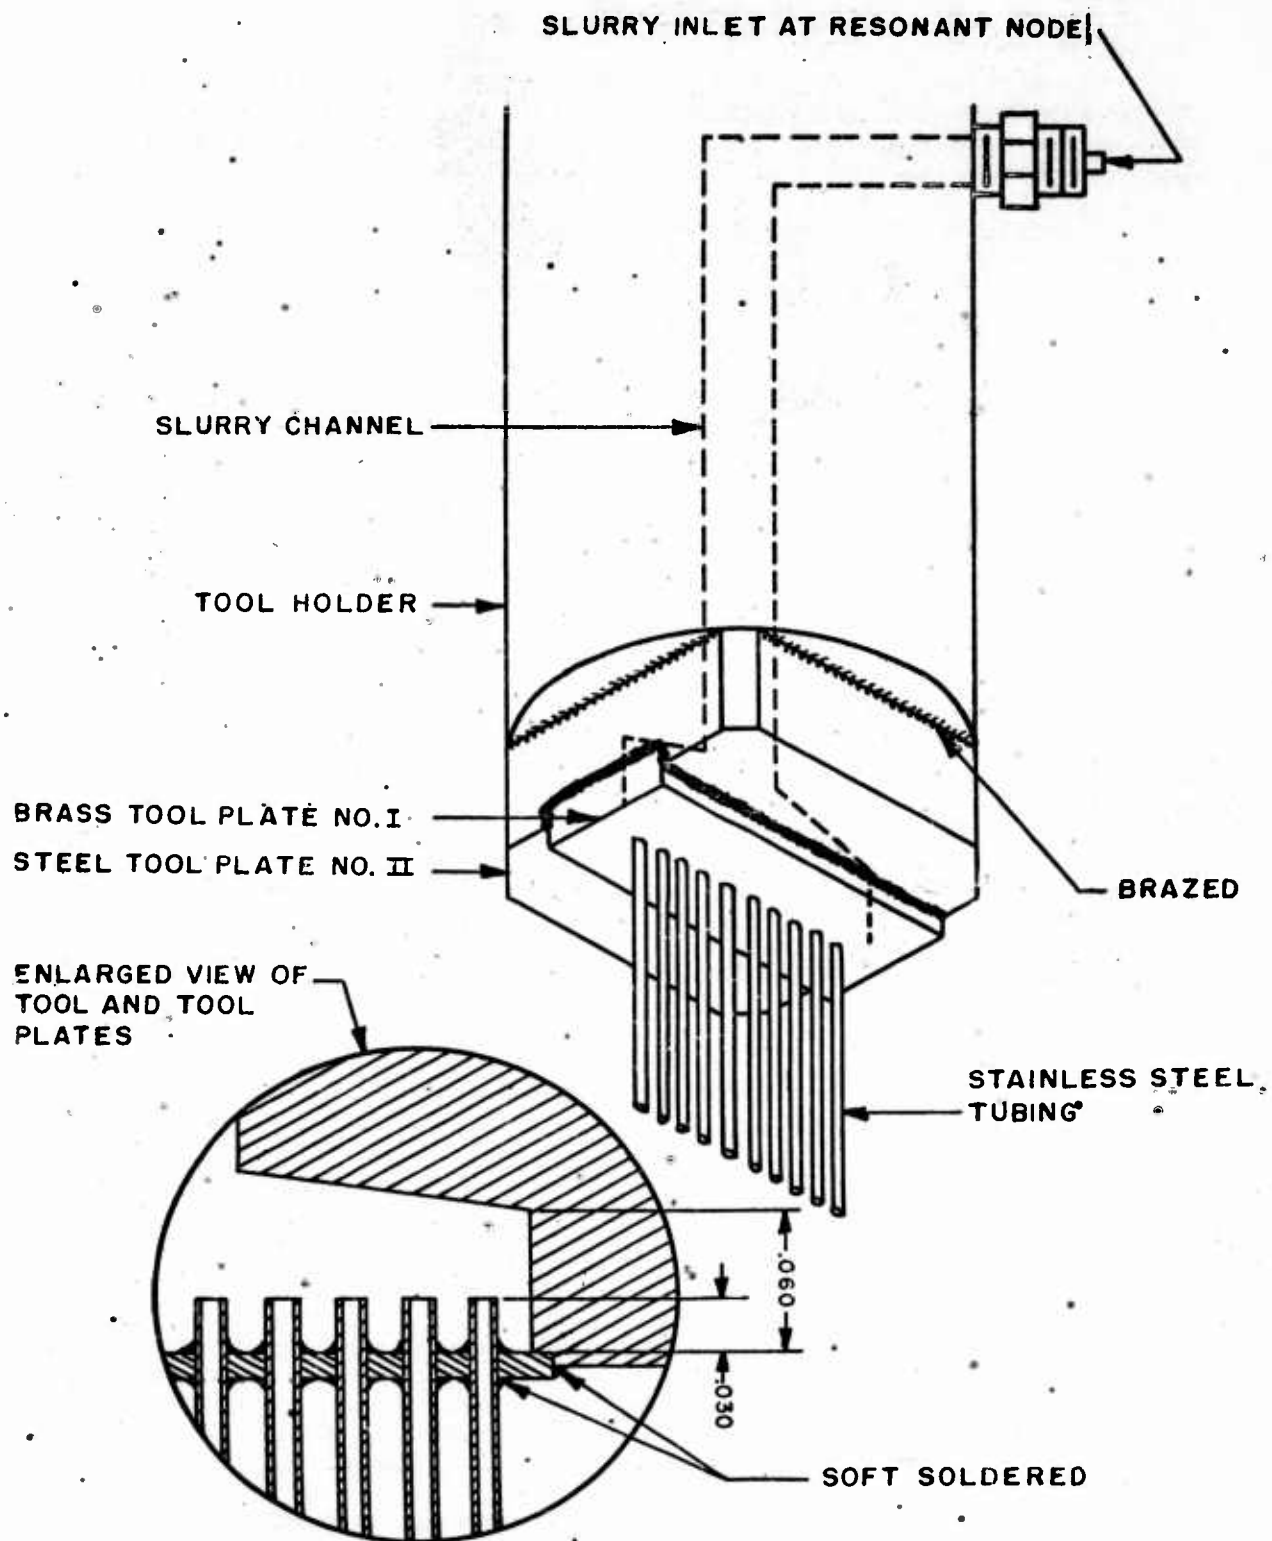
Fabrication details of tool employed in impact grinding a 10-hole array.
